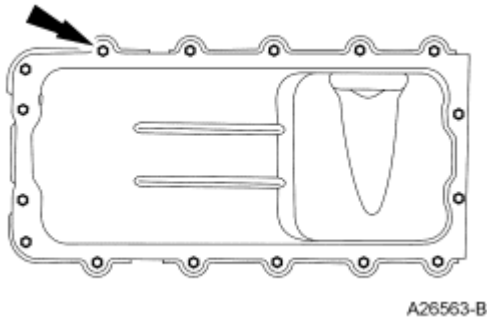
Locating Oil Pan And Oil Pan Gasket Bolts
